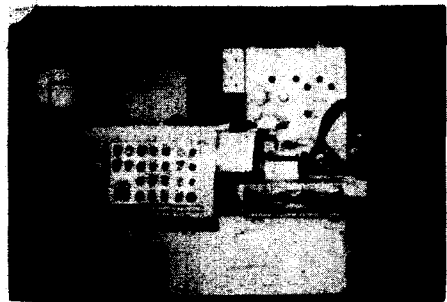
Toyoda F.W. 15H friction welder used for weld experiment
